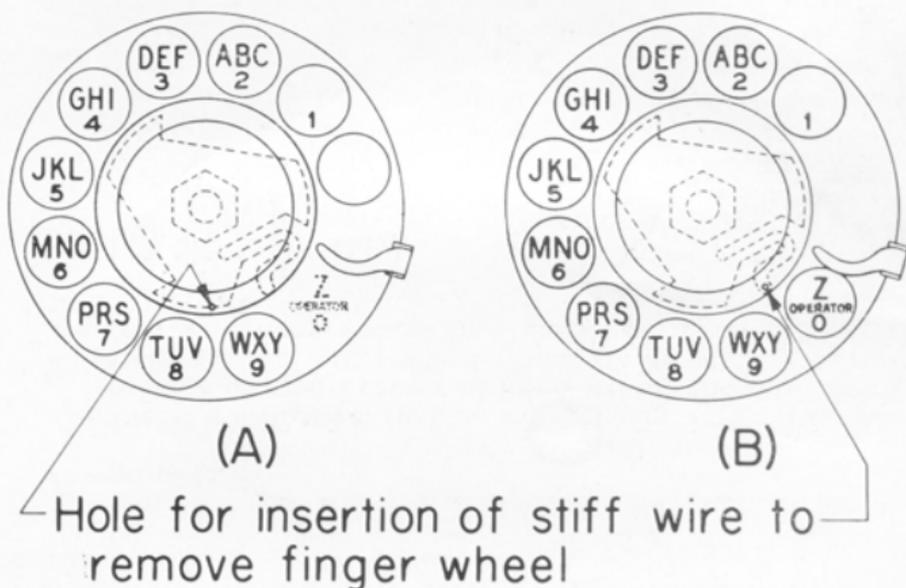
P-13A106 Finger-Wheel Assembly for 6- and 7-Type Dials
